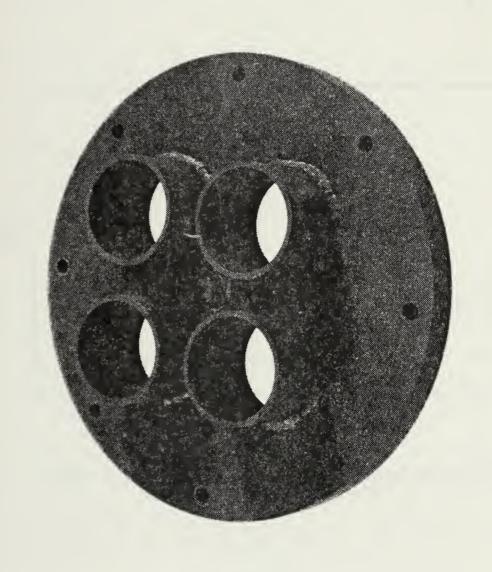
Primary Flow Nozzle Plate (Front View)
